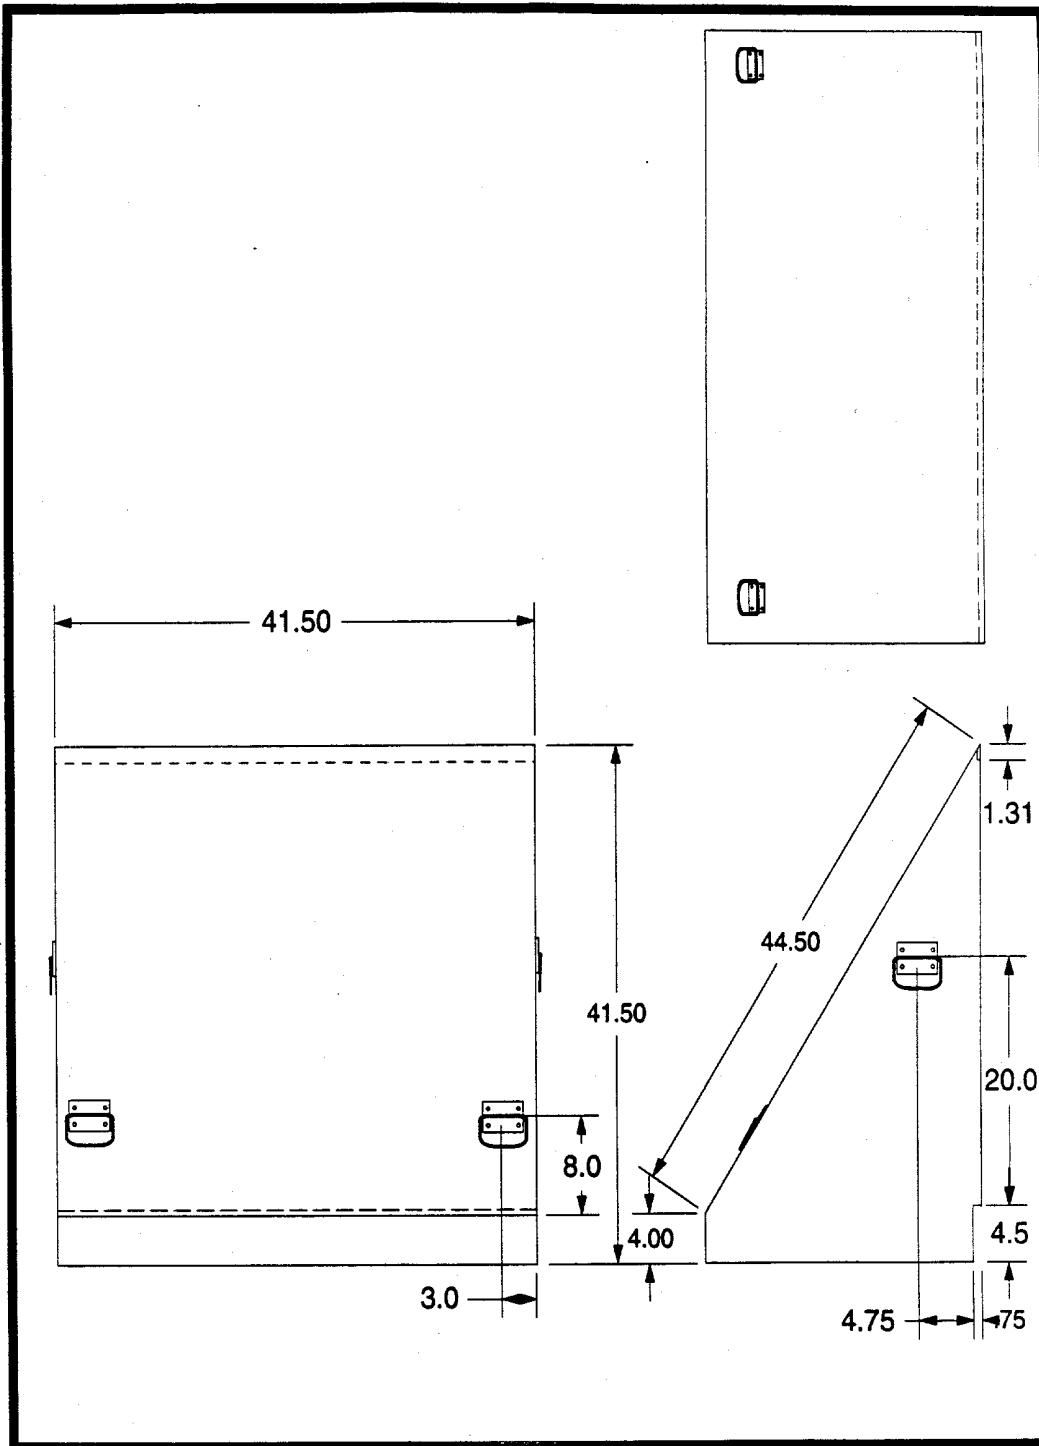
Engineering Drawing of Wood Burn Box Top Cover
